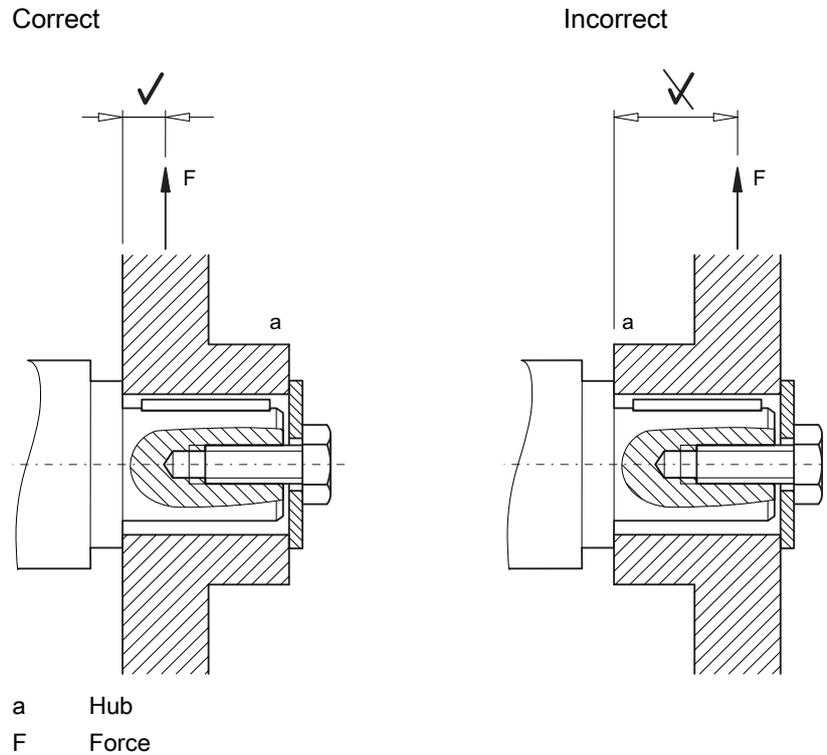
Mounting arrangement for the lowest possible stress on shafts and bearings
